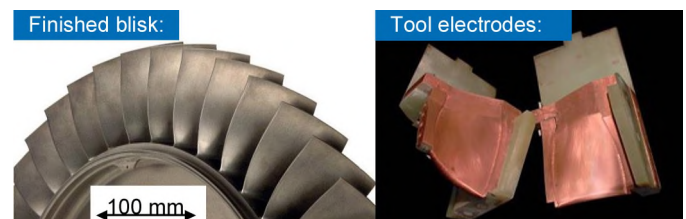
Low pressure compressor blisk out of Ti6Al4V machined via ECM, [62,179].
